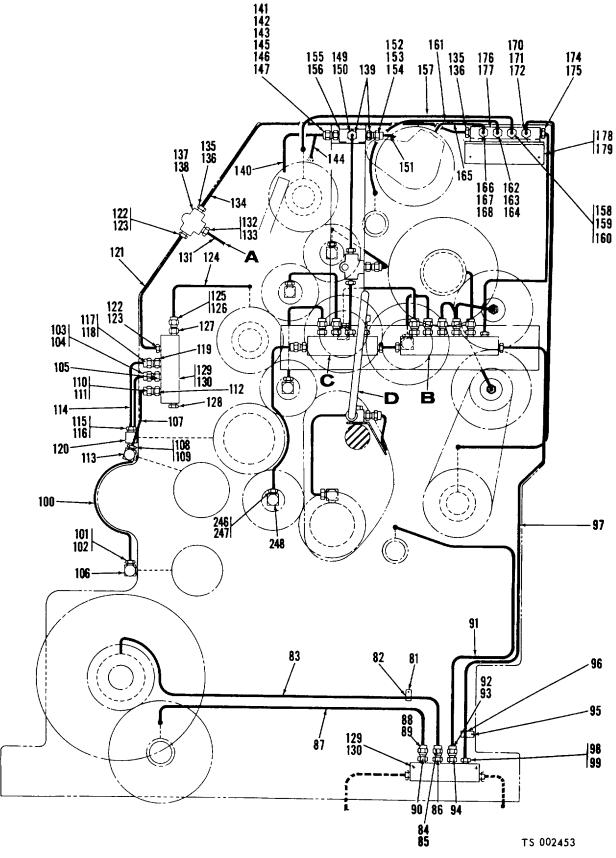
Offset unit oil line assembly. (Sheet 2 of 5 )
